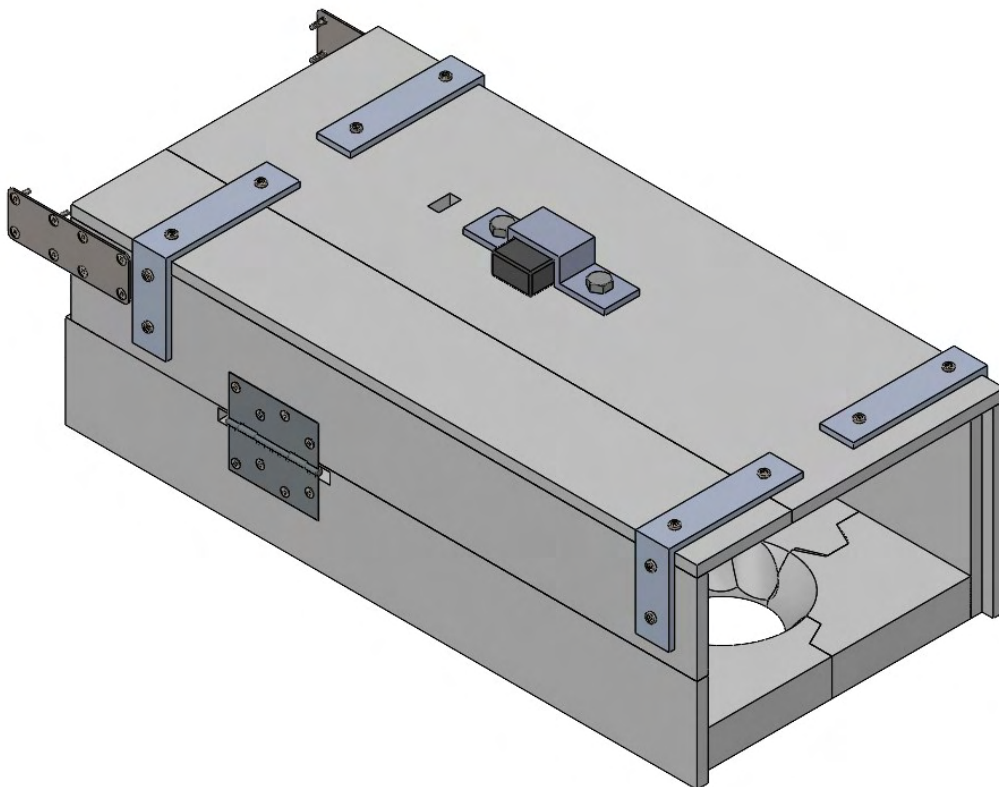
Isometric Closed View of Transfer Unit Sub-Assembly
